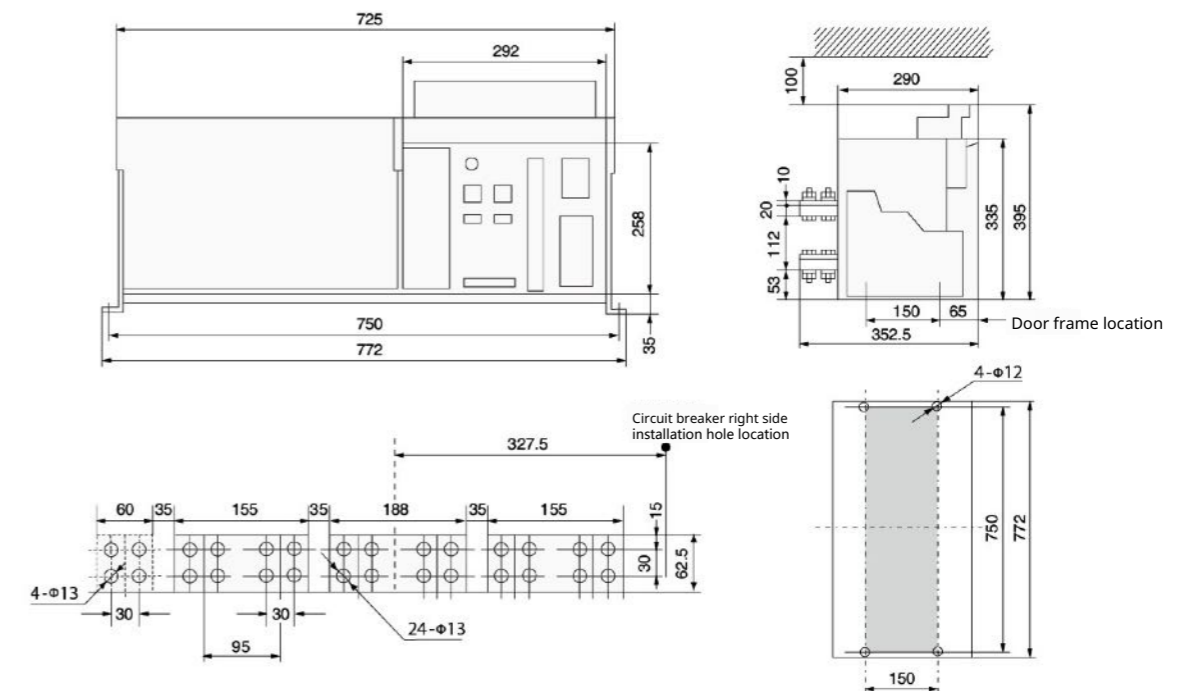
Fixed SDW1-4000 circuit breaker ( $I_n = 4000A$ , four-pole) dimensional drawing
